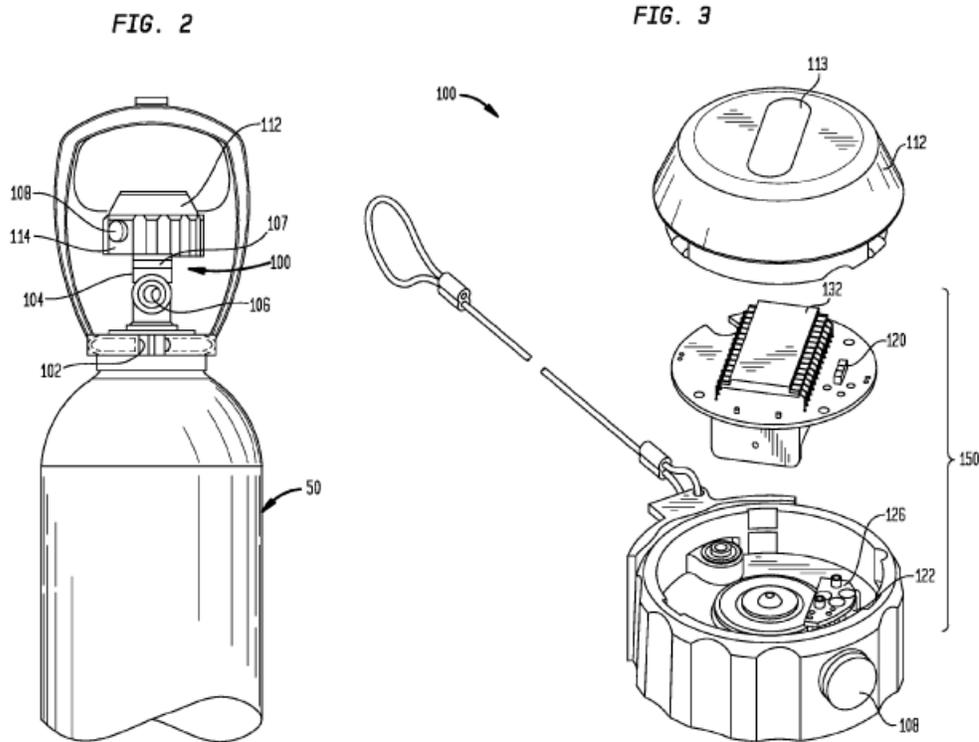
depicts valve assembly 100 and actuator 114 of the gas delivery device in communication via valve 107 with gas source 50, and Figure 3 illustrates an exploded view of actuator 114 and valve assembly 100. *Id.*, 6:11–35. Figure 4 is reproduced below:
